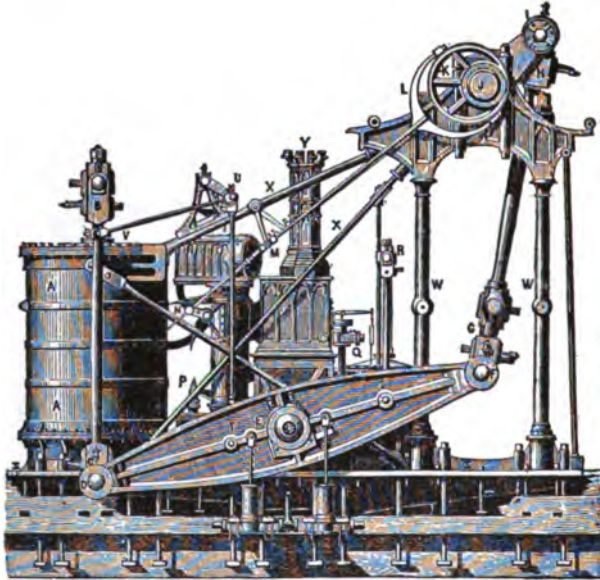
COPELAND'S SIDE-LEVER ENGINE, 1849.
